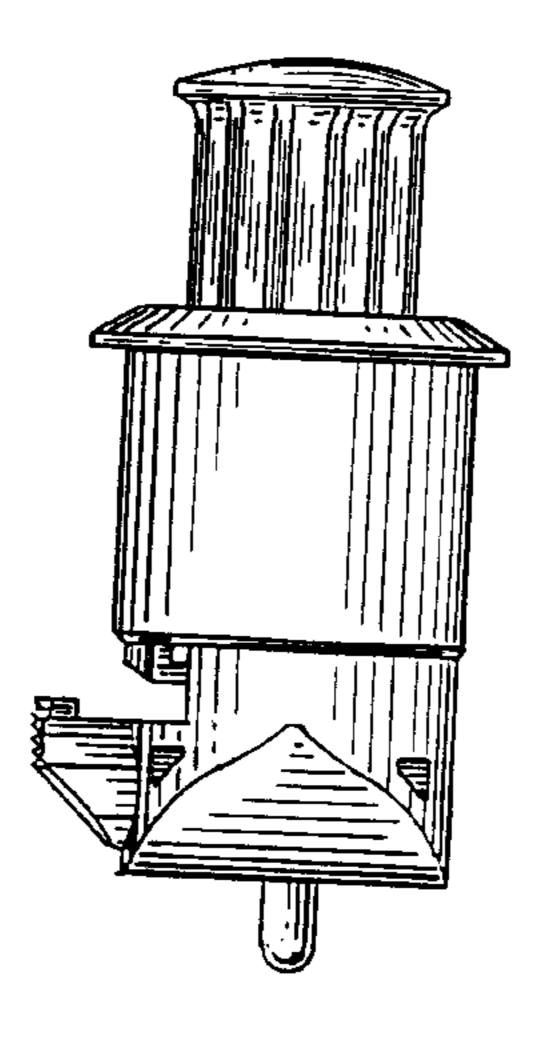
is a perspective view of the latch of FIG. 22 shown in a closed position.
